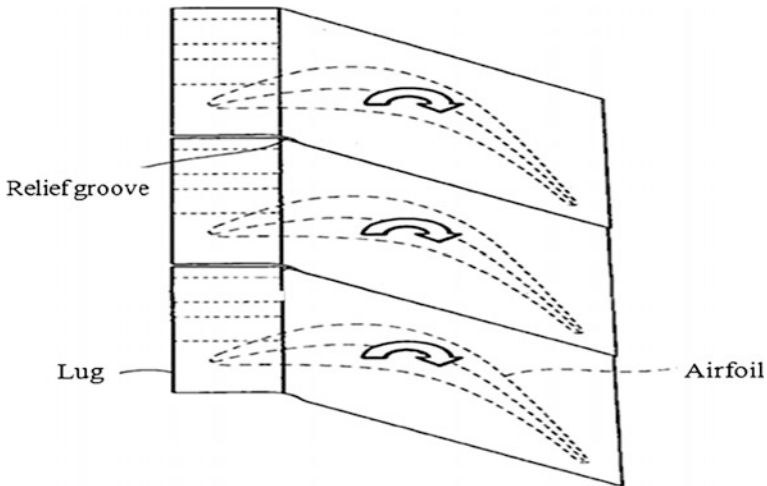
View similar to Fig. 5 with the fixture removed illustrating a counter-rotation of the shroud and airfoil
